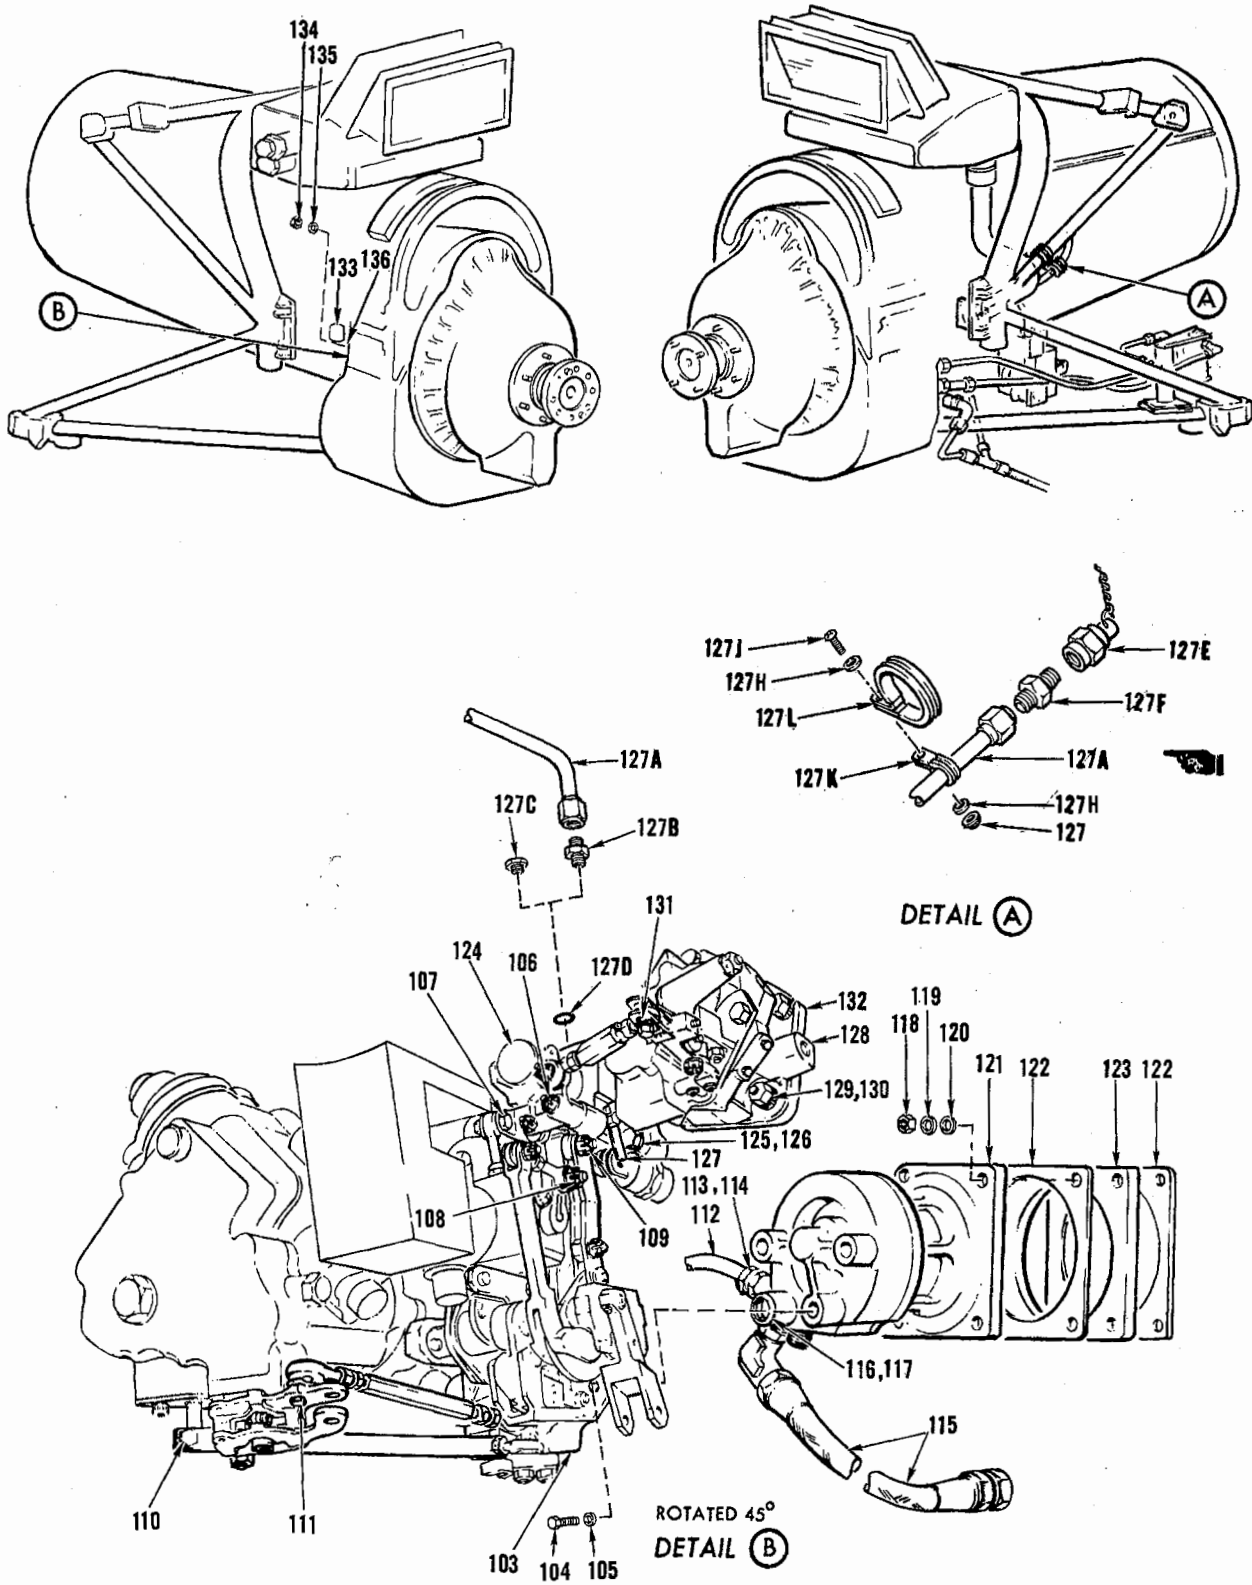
Pod Package - Engine Accessories (Sheet 3)
